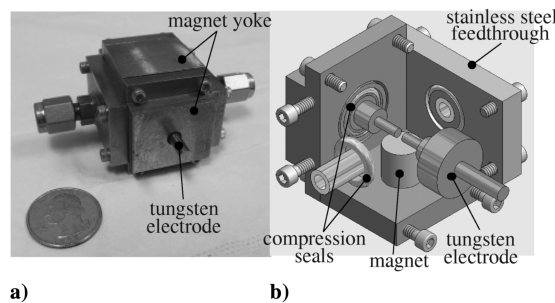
Lithium EM pump: a) photograph of assembled pump (with U.S. quarter to show relative scale), b) CAD drawing with pump body removed to show inner detail.
